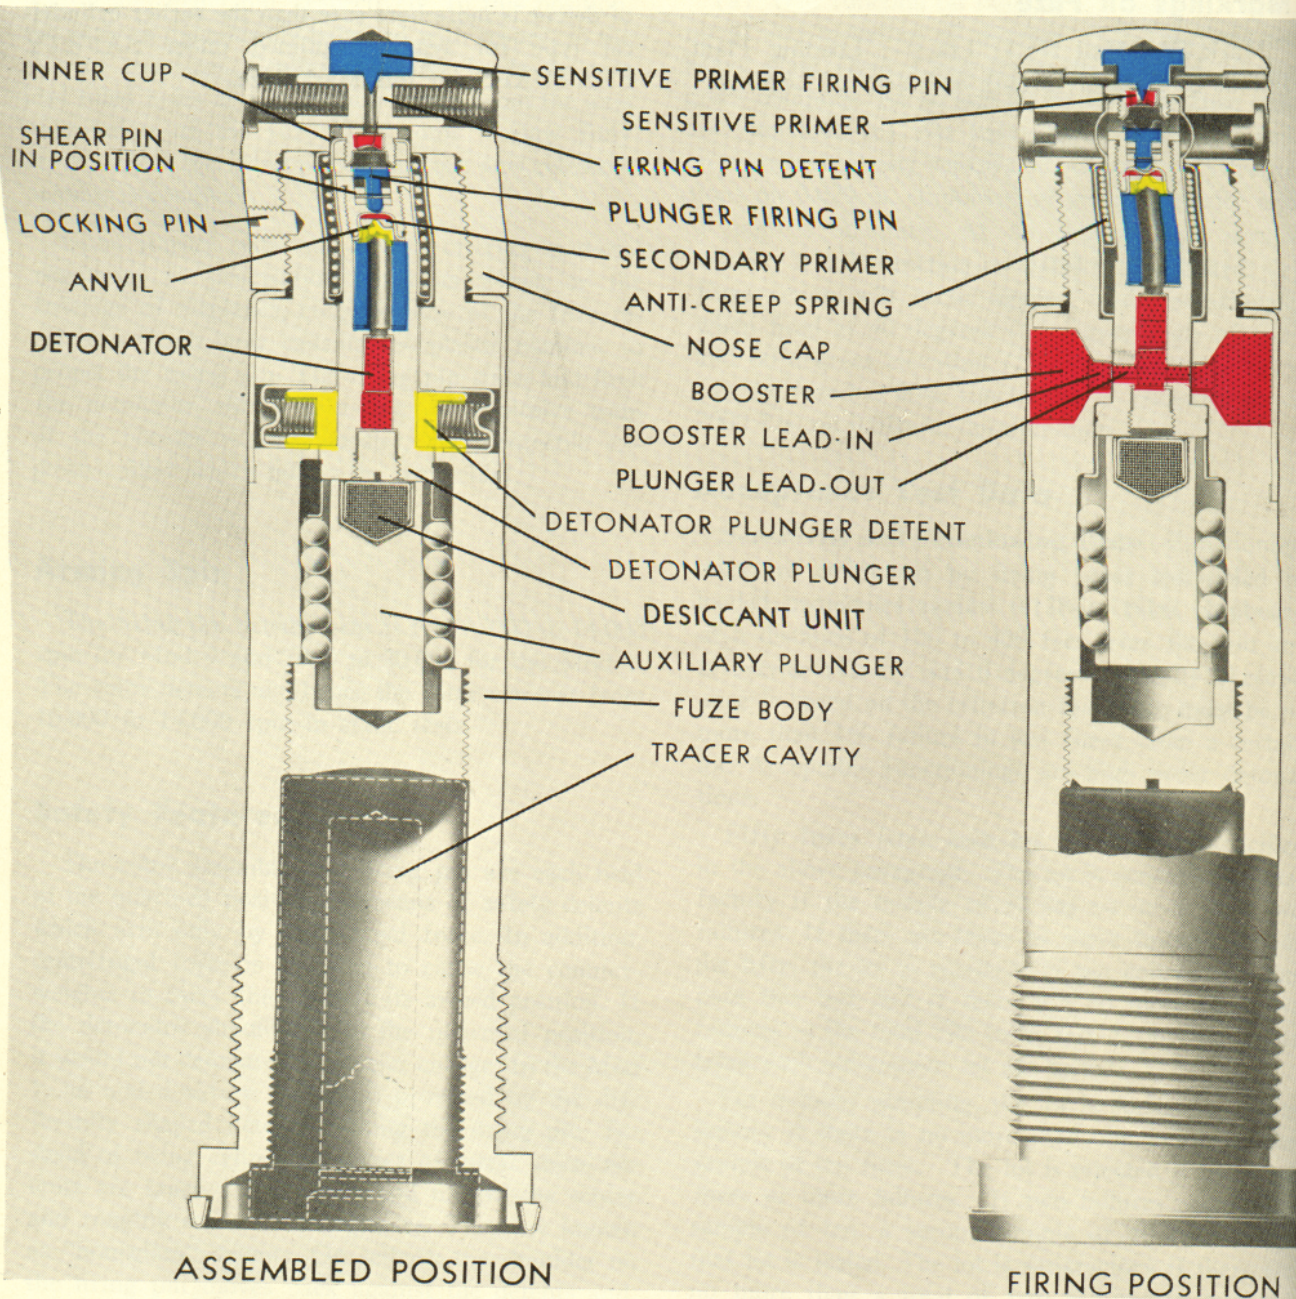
Base Detonating Fuze Mk 28—Sectional View
